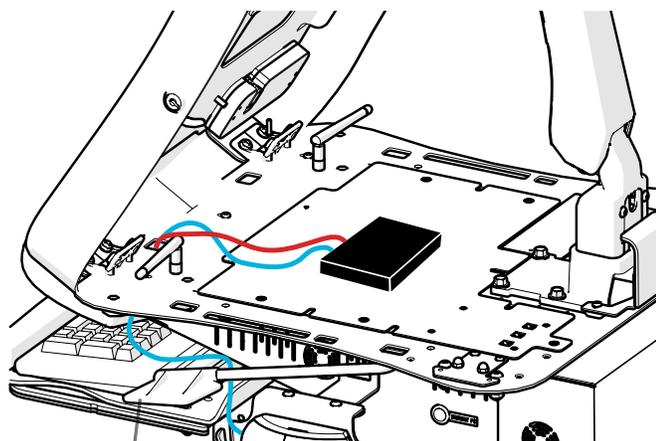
Underneath view of desk keyboard and Mouse Cable Routing Ports
